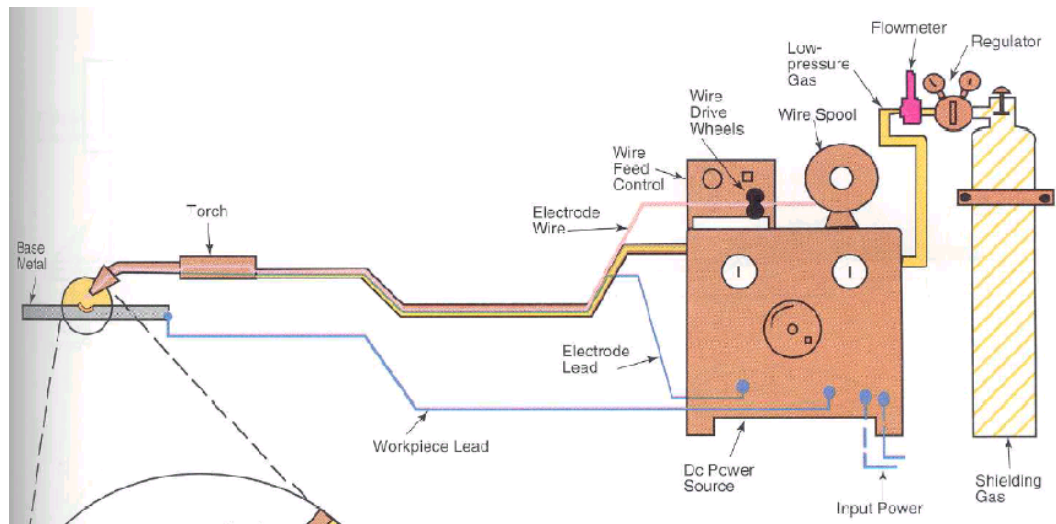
Gas Metal Arc Welding Process ^[6]
